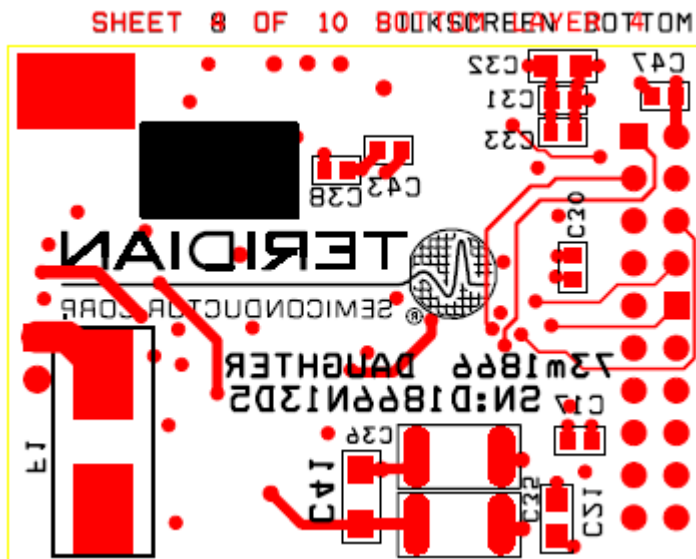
73M1866B Keychain Demo Board Bottom Layer
